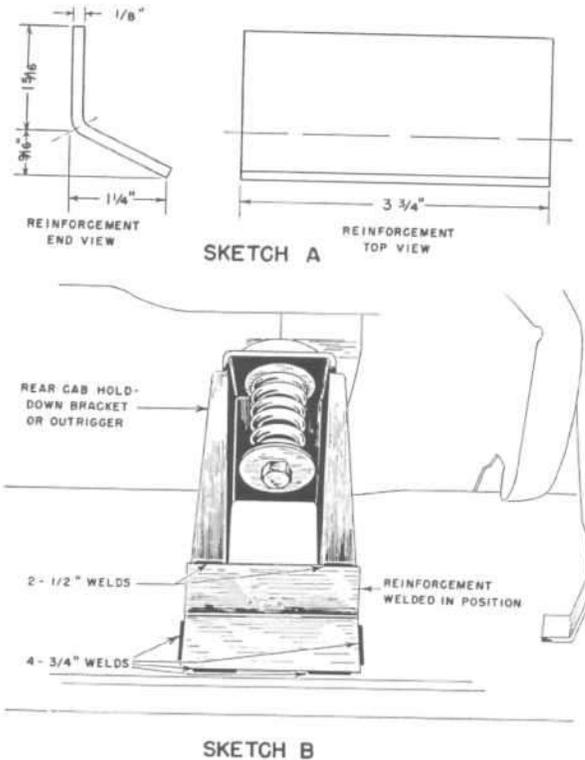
CAB MOUNTING BRACKET REINFORCEMENT
